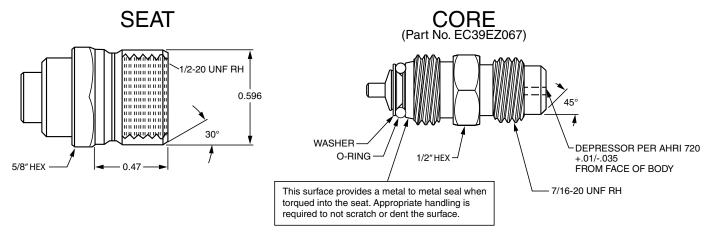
CoreMax<sup>1</sup> Access Port Assembly
